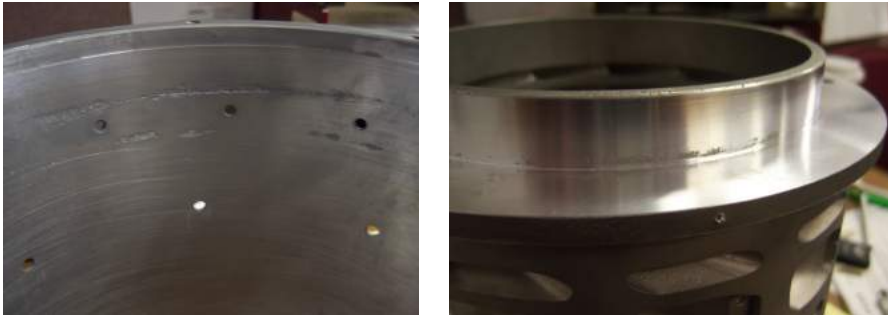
Pitting corrosion damage in a Boeing 747 APU generator housing. Courtesy of L.J. Walch.
